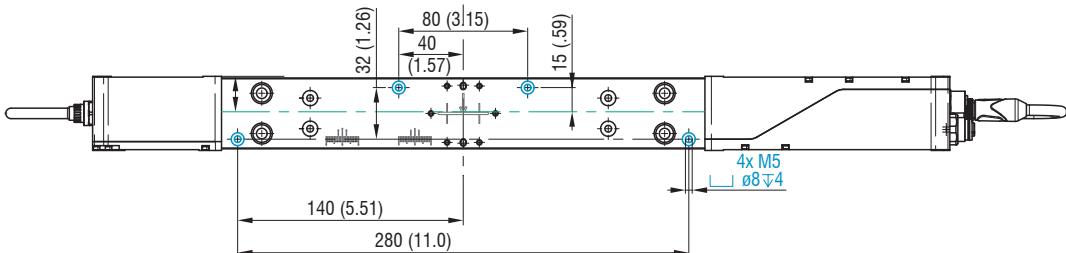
Dimensional drawing of mounting rail ODC2700-10, ODC2700-40, standard mounting
